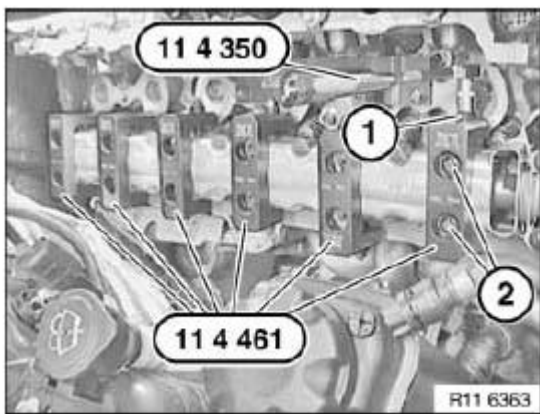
Identifying Special Tools (11 4 461), (11 4 350), Screw And Connections
